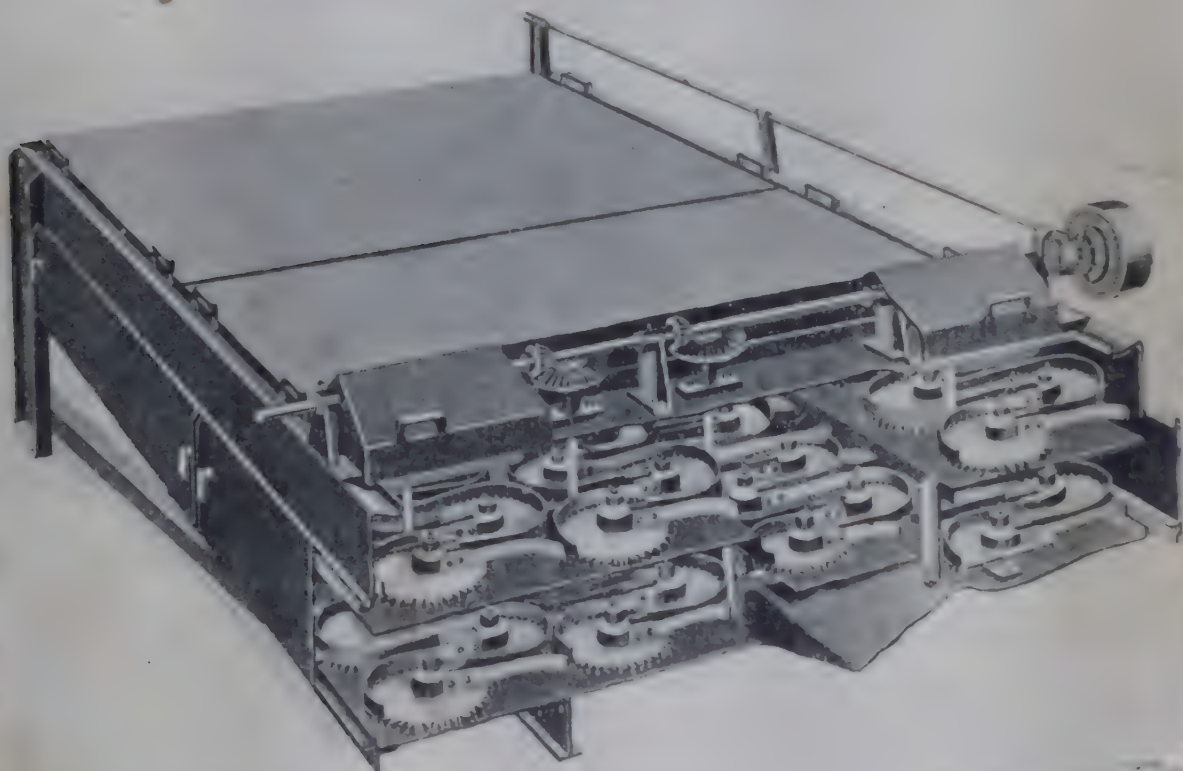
Exhaust box with lid removed to show method of conveying cans. (Courtesy Food Machinery Corporation.)
